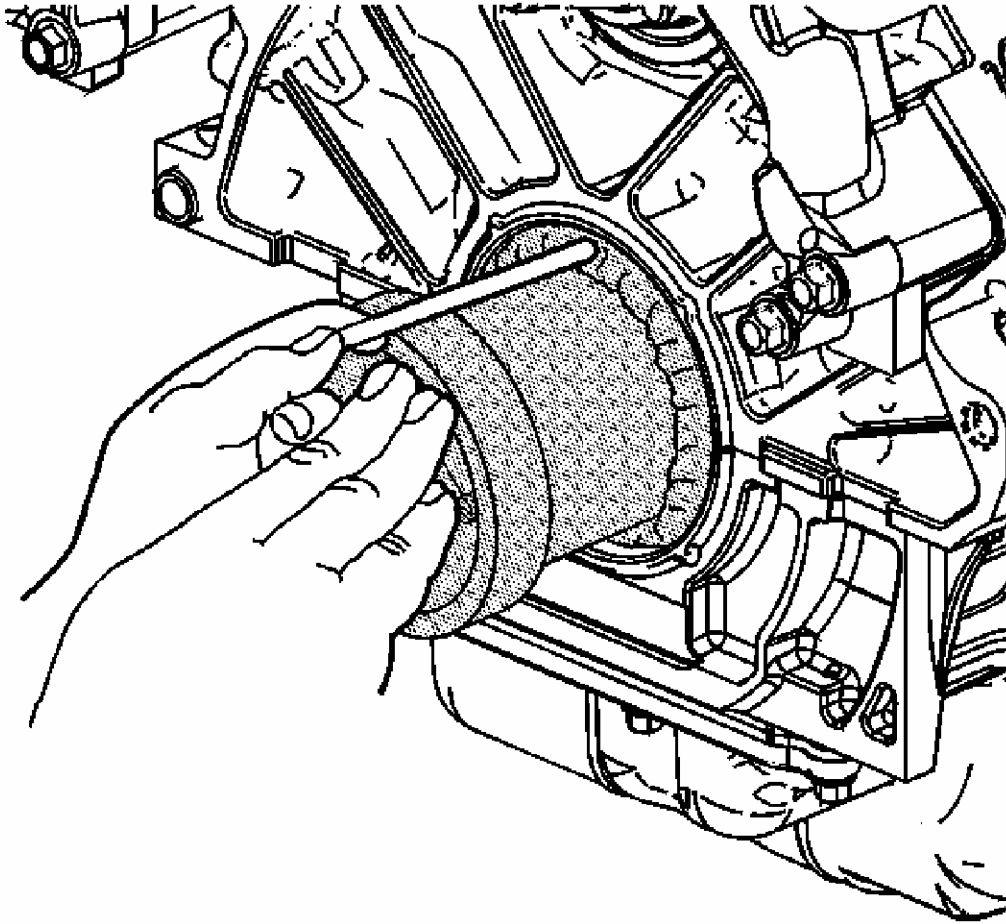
Spreading Sealant To Rear Seal Applicator Housing
